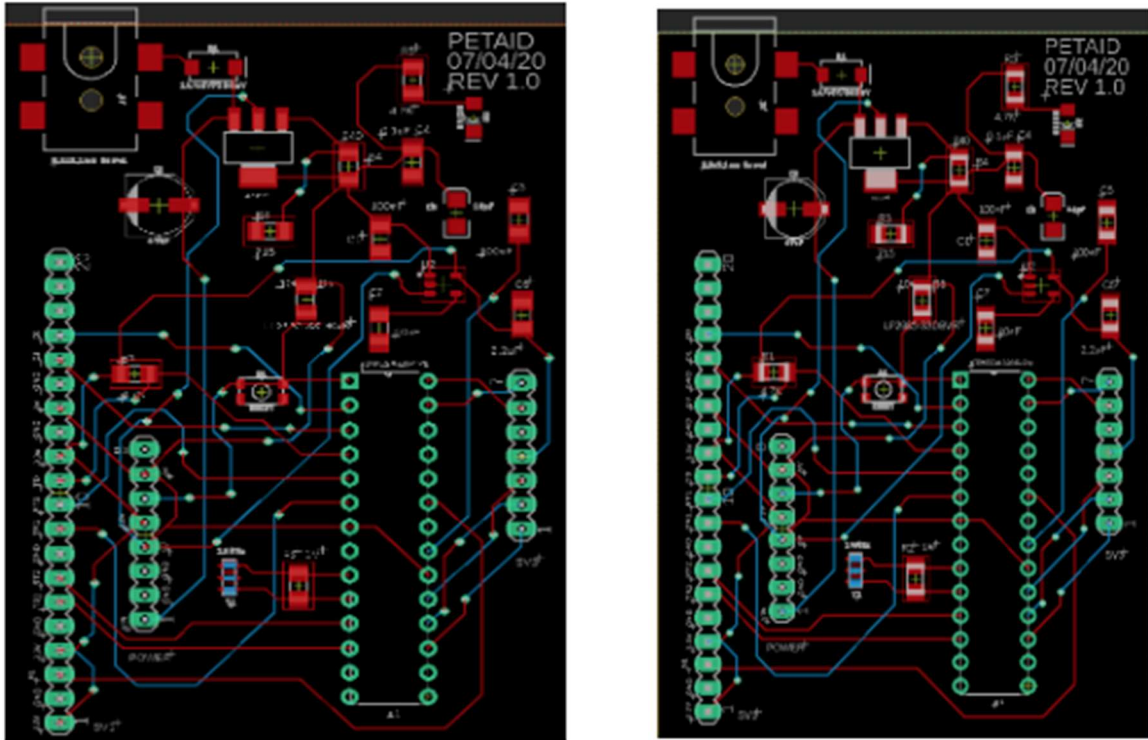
Printed circuit board top layer (left) and bottom layer (right).
